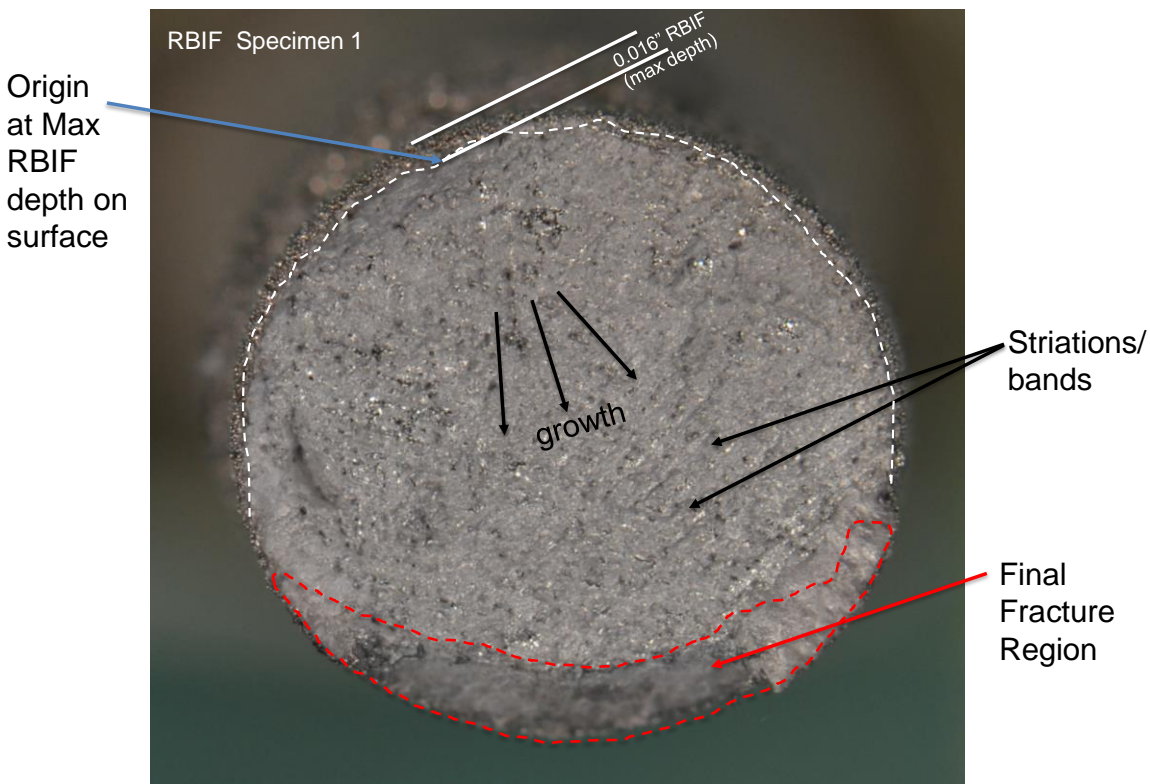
Fracture Surface Photograph of RBIF Specimens 1 ~10X Magnification
